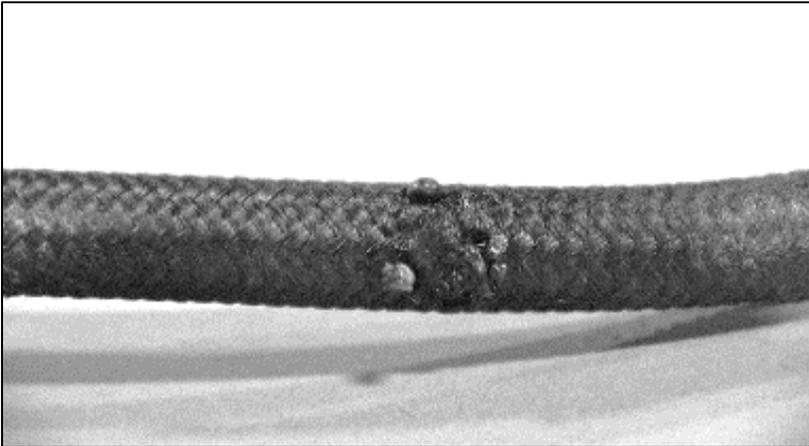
Power Steering Hose Failure of Steel Wire Braiding with Beading
